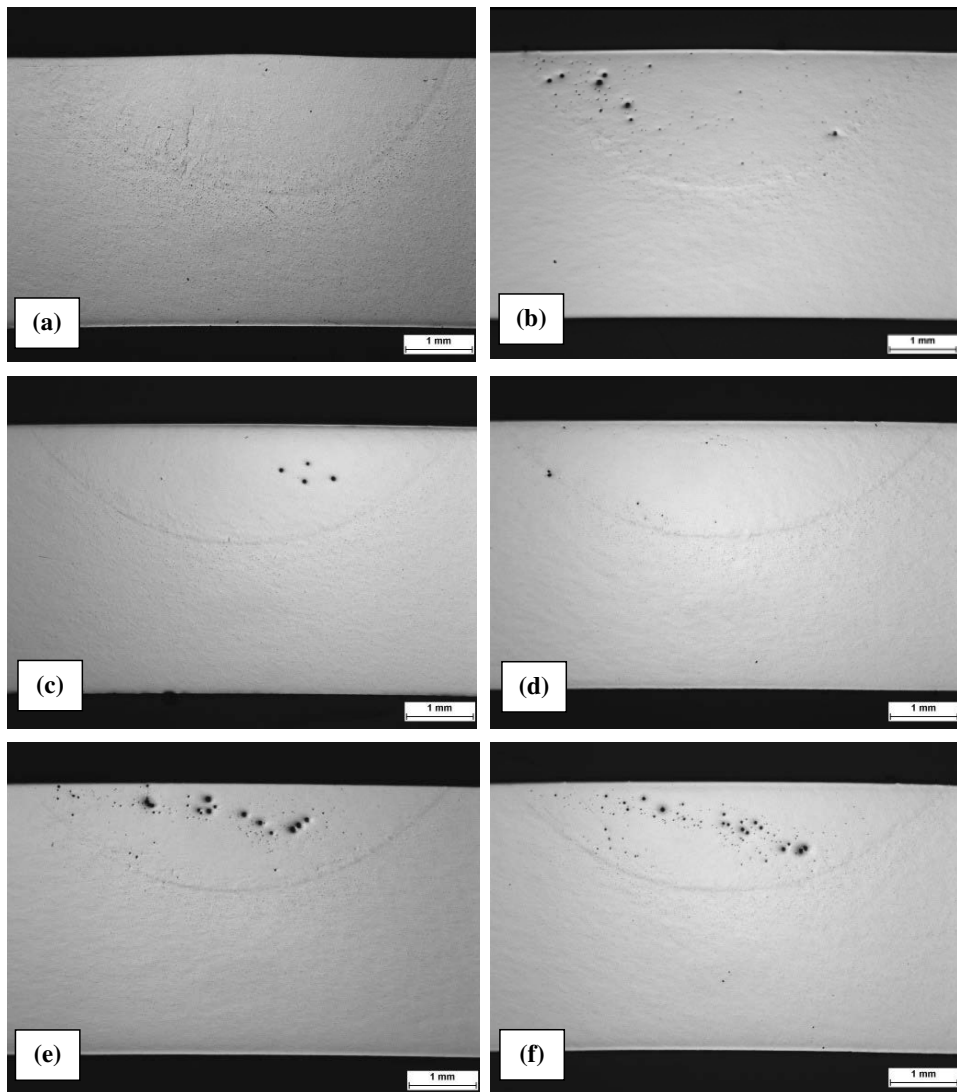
Weld cross-section at low magnification for hydrogen content in welding gas of (a) 0%, (b) 0.10%, (c) 0.14%, (d) 0.18%, (e) 0.22%, and (f) 0.26%. Welding current 95 A.
